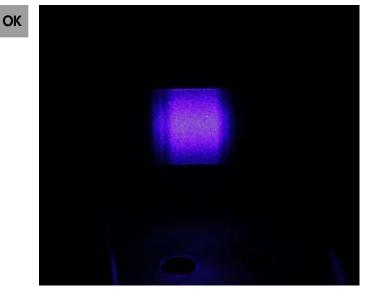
Laser profile when the compressed air nozzle is set correctly
